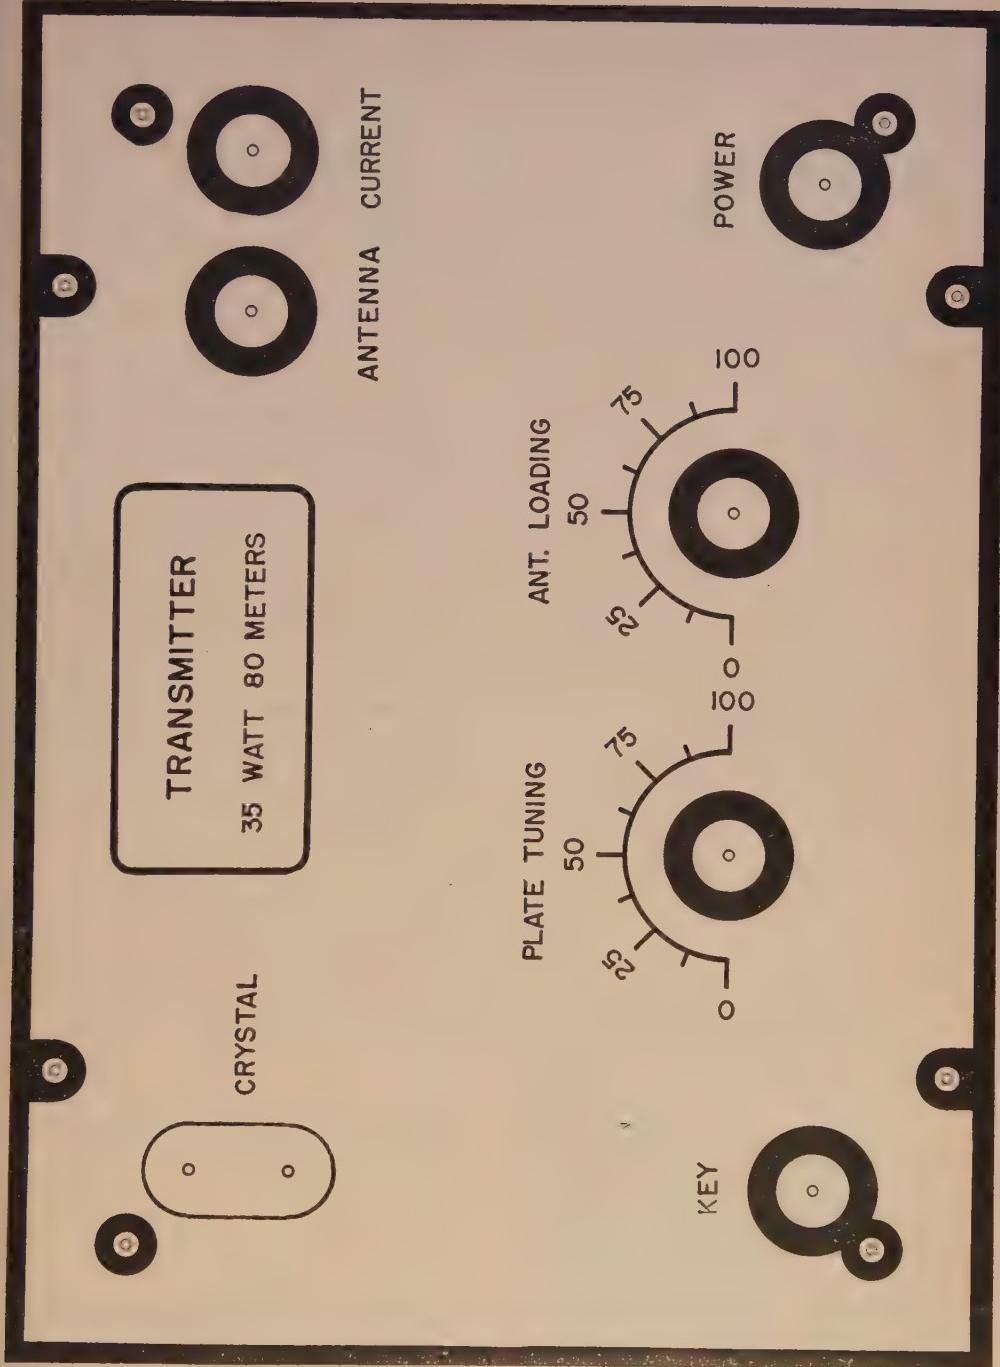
Front panel may be produced by the photo-engraving process using this master drawing. Call letters or signature may be added with black ink prior to photographing.
